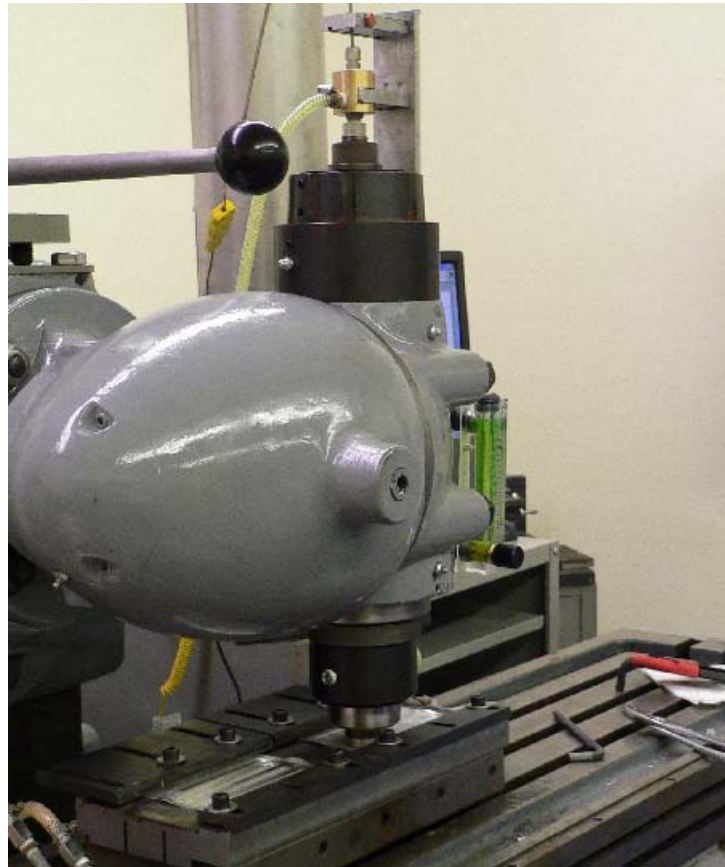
Kearney & Trecker friction stir welding setup. The cooled tool holder is the collar around the tool (cooling can be adjusted by a flow meter). Process temperature is measured by the thermocouple entering the top of the spindle.
